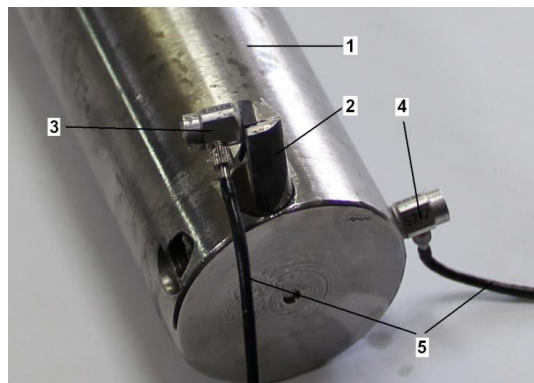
Practical realization of modified tool structure: 1-boring tool holder, 2-cutting insert, 3-sensor for radial and 4-for tangential vibrations measurements, 5-cables.
